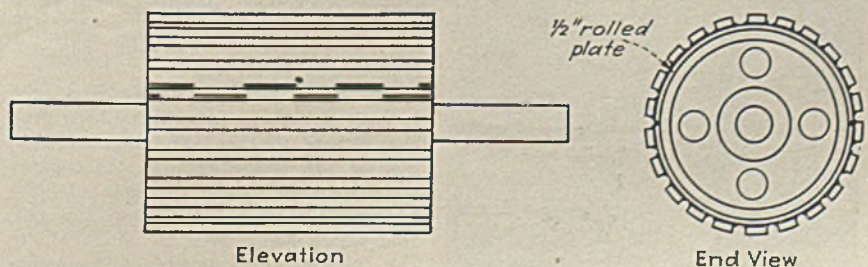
(below)—Welding half-sole mild steel plates and skip welded abrasive steel bars reduces maintenance on this roll crusher
